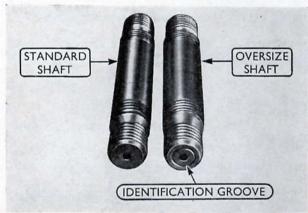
Standard and oversize fulcrum shafts. The amount of oversize is 004 in. and applies only to the inner threads which engage the crossmember
